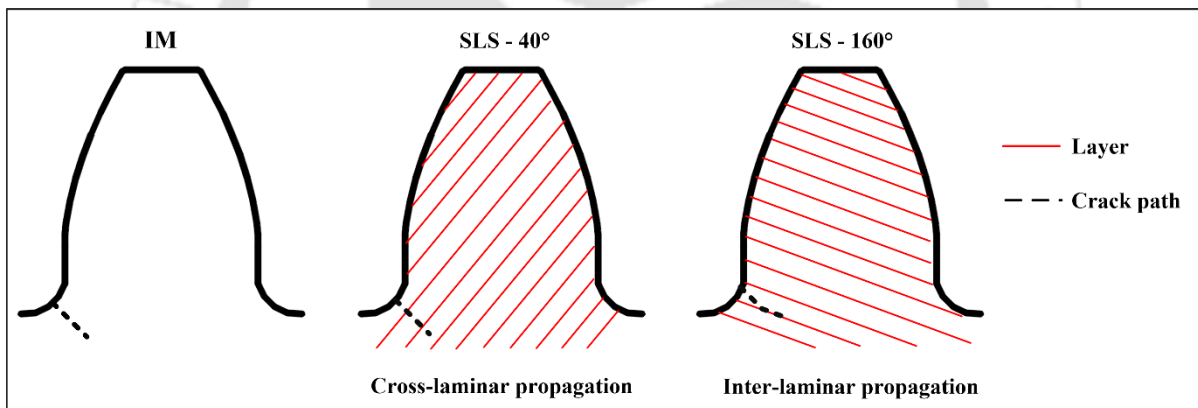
Crack propagation in injection-molded and selective laser sintered gear teeth.
